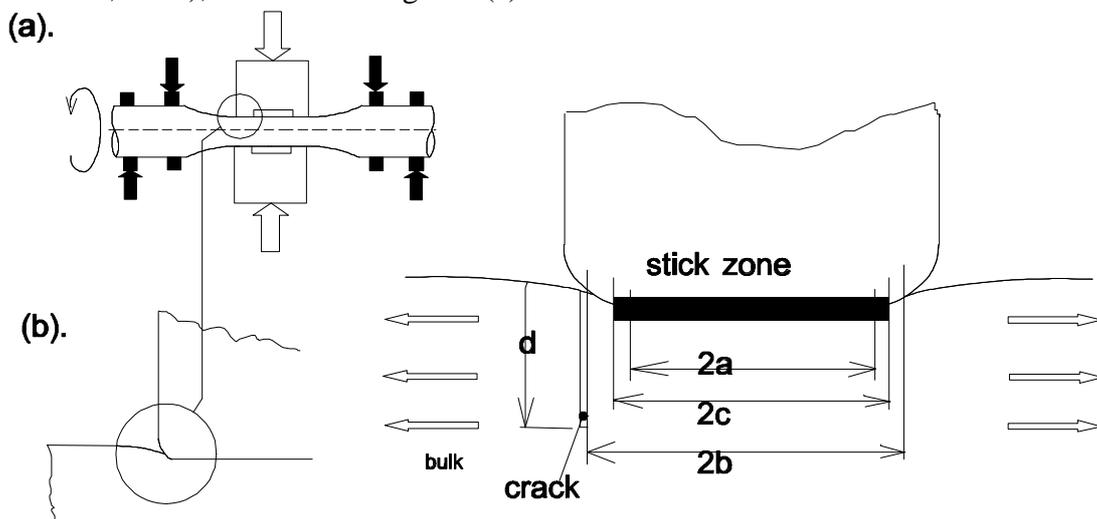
Rotating bending fretting fatigue setup Figure 2 - Geometry of the contact
